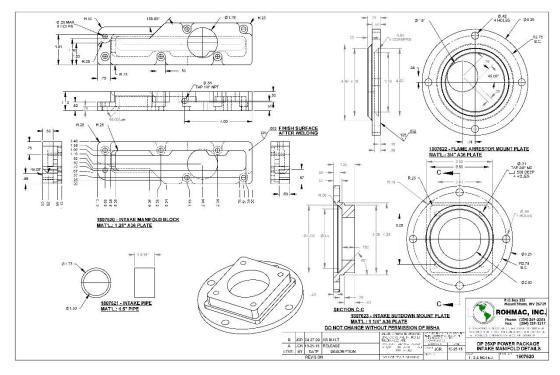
Revised Diesel Power Package Intake Manifold Detail Drawing
